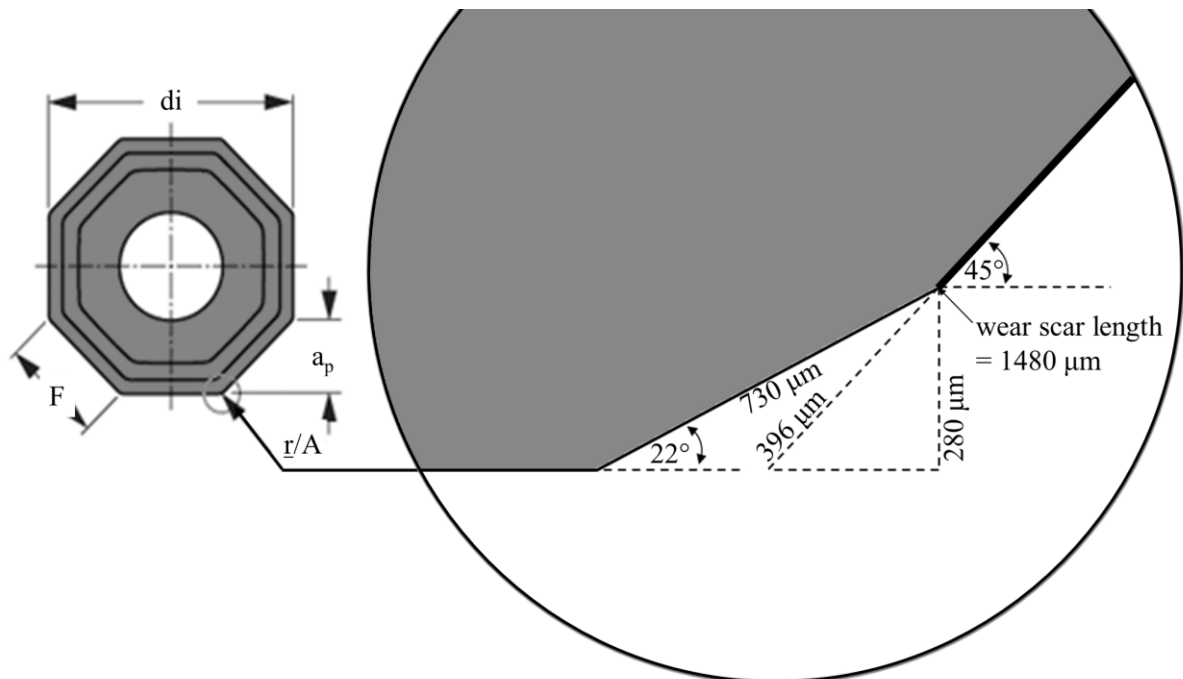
Schematic of the corner edge of the carbide inserts which shows the corner landing
